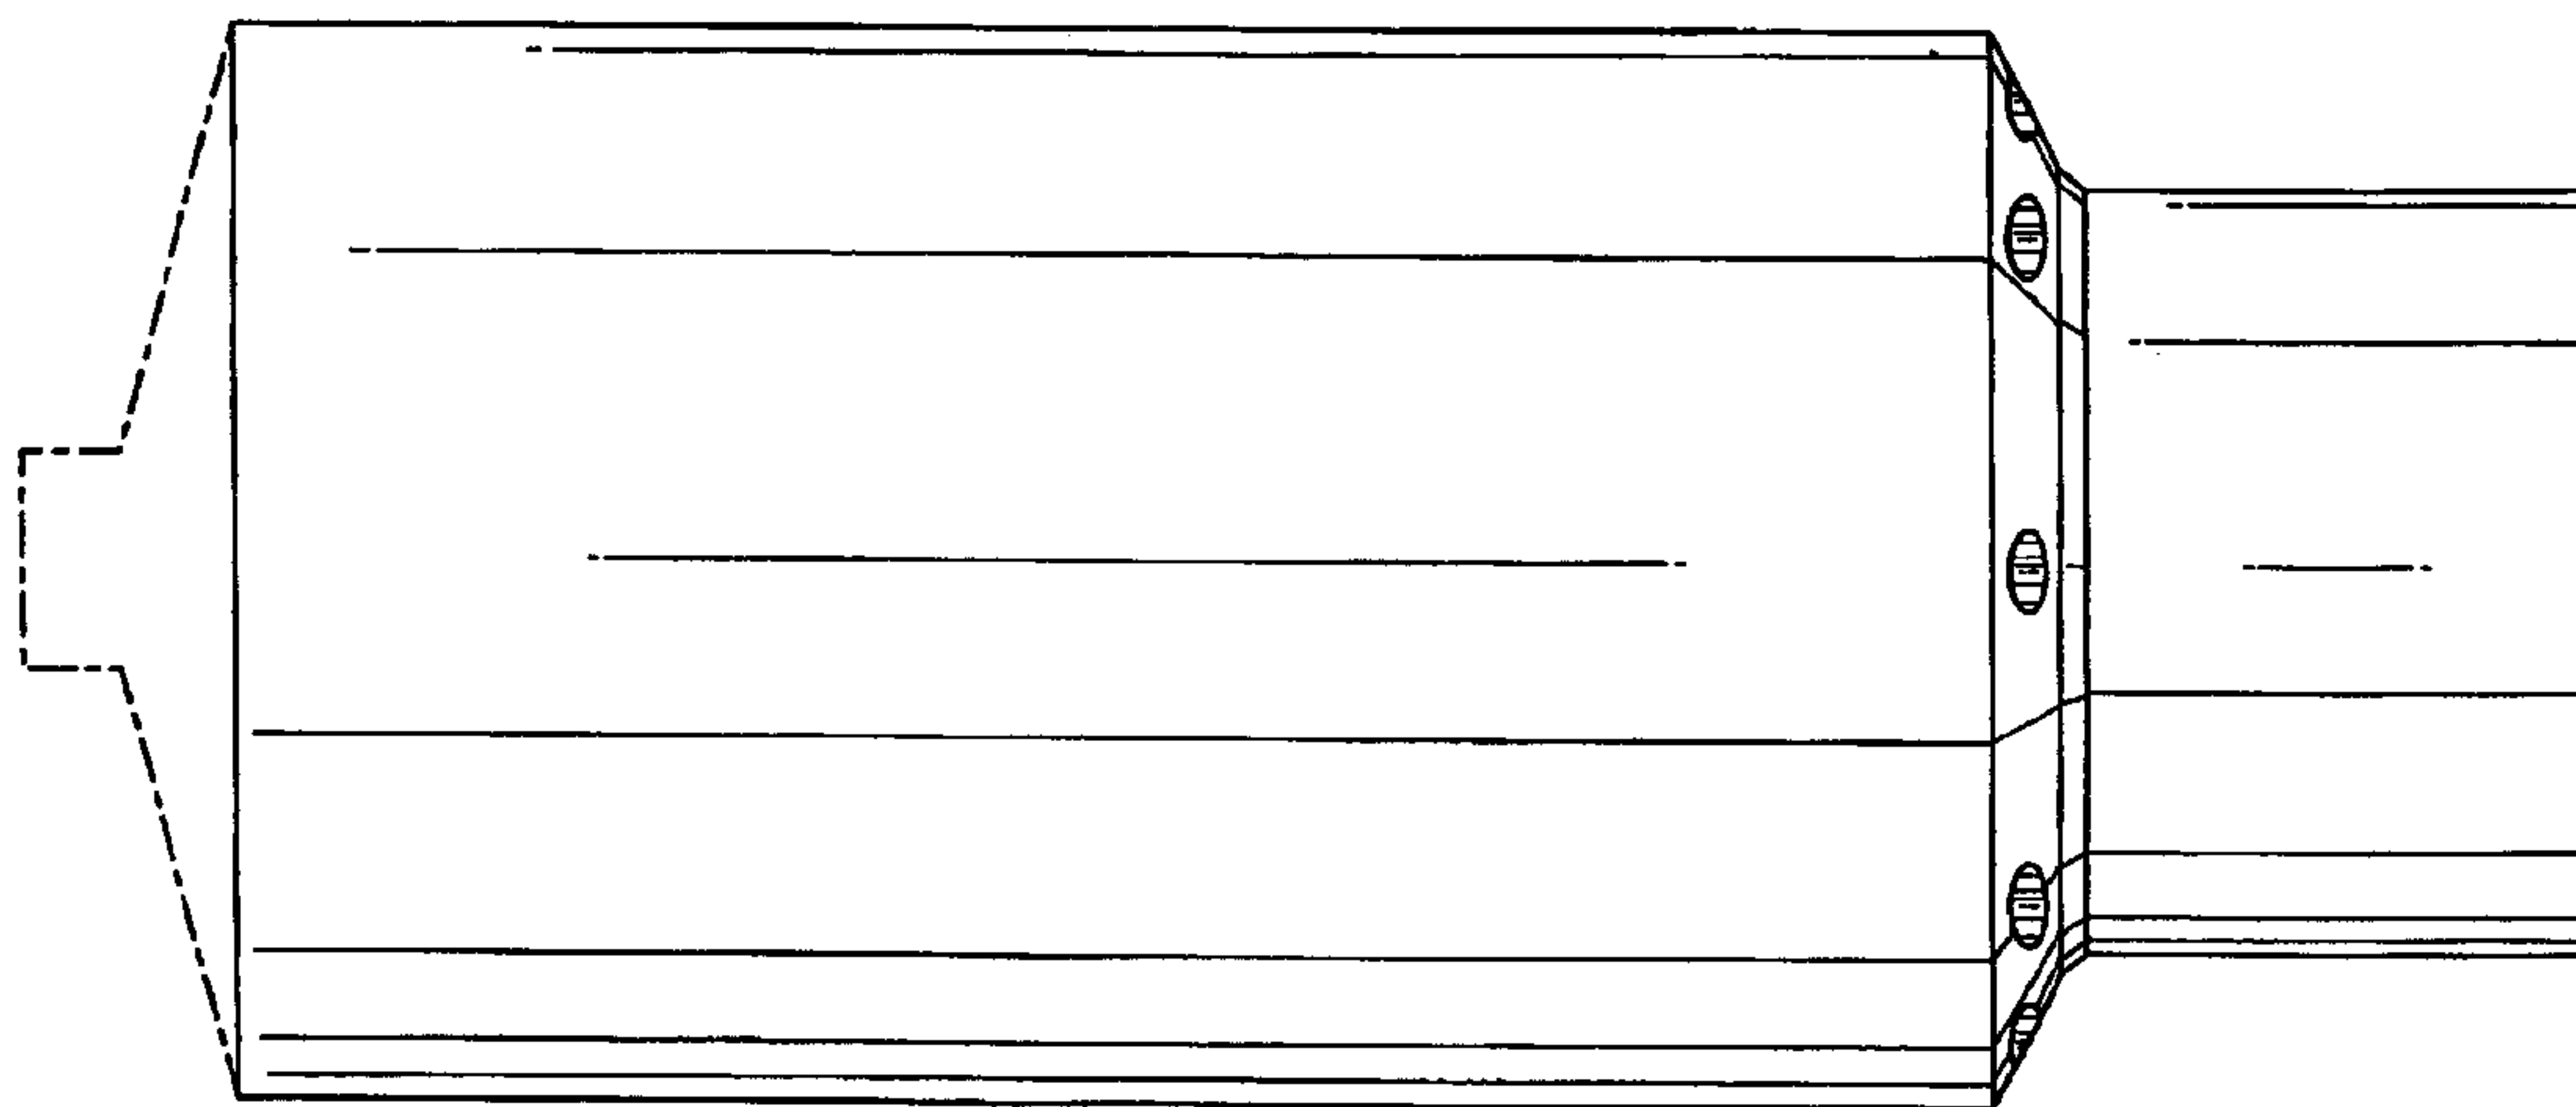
is a perspective view of a muffler employing the ornamental design;
